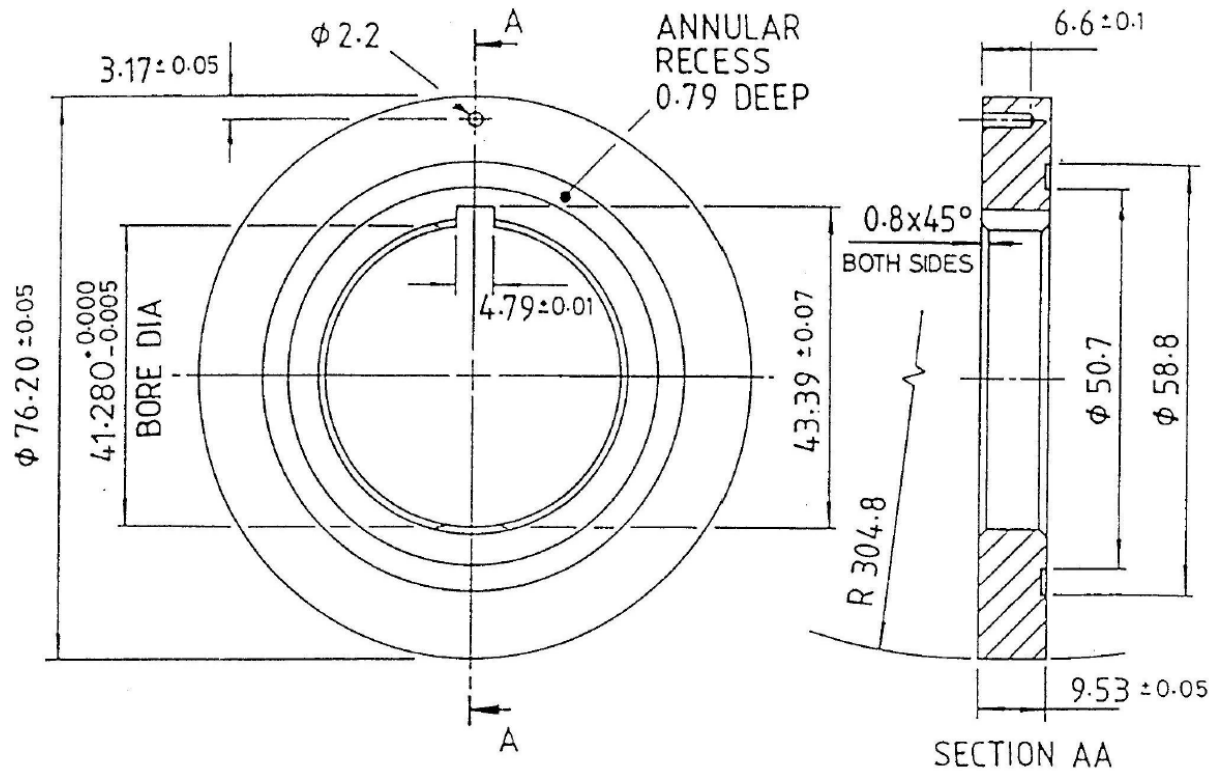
Drawing of test disk (all dimensions in mm).
